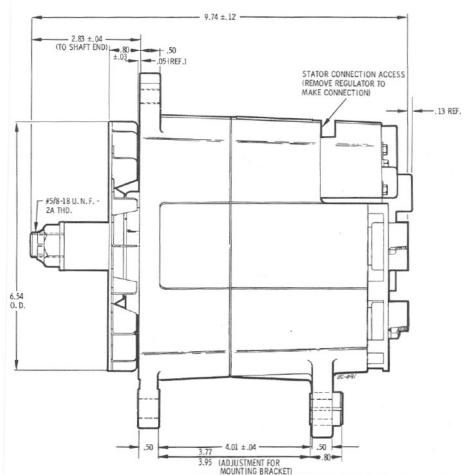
ALTERNATOR MOUNTING DIMENSIONS
